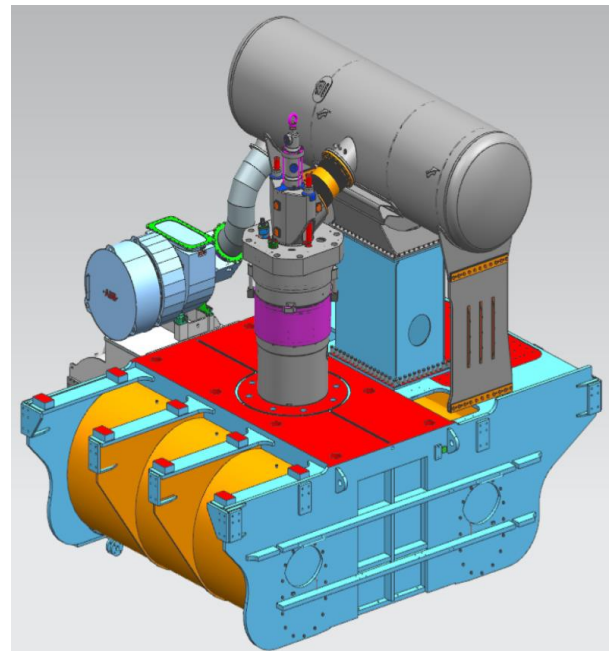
Cast cylinder jacket with attached scavenge air receiver on fuel and exhaust side; size-adjusted exhaust manifold
